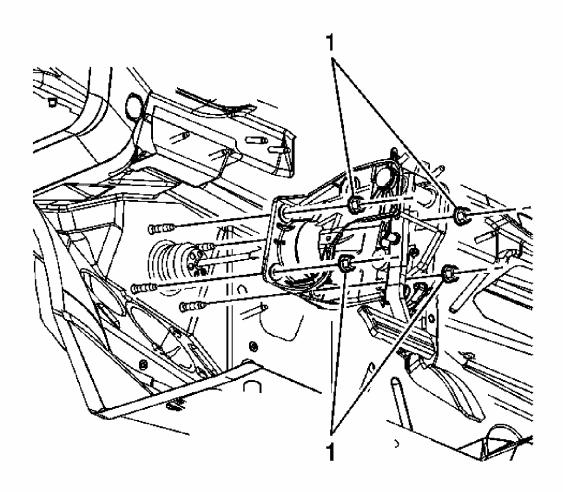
Identifying Vacuum Brake Booster Mounting Nuts Courtesy of GENERAL MOTORS CORP.
